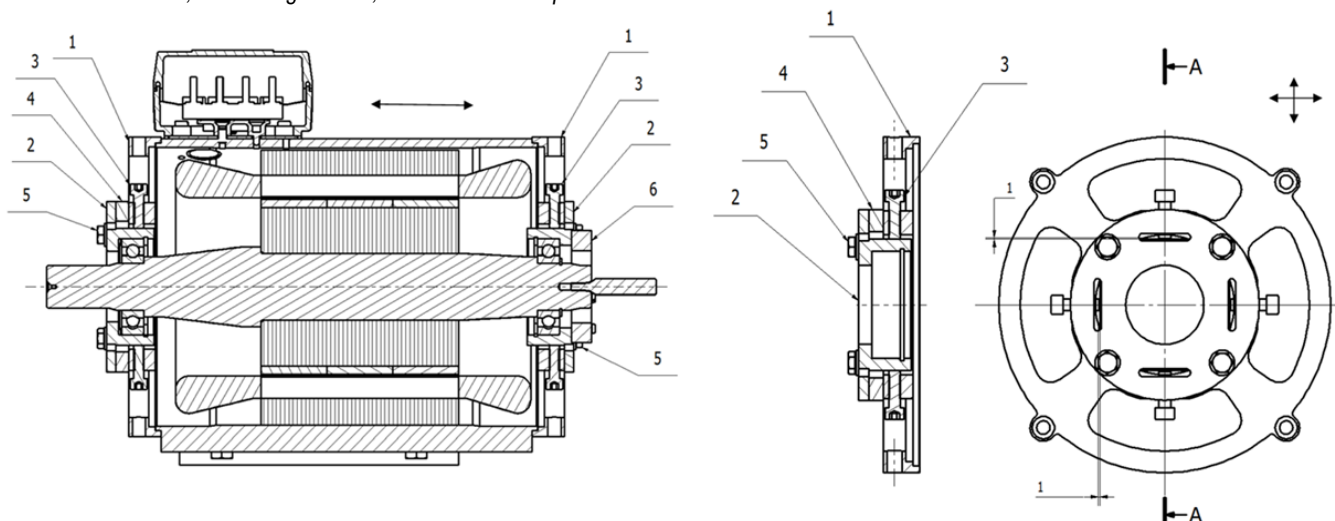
Adjustable motor's bearing disc - adjustable in the axial and radial plane.
